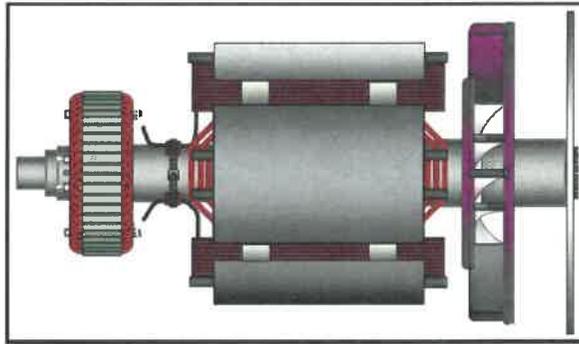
SINGLE BEARING ALTERNATOR ROTOR SHOWING COUPLING DISCS BOLTED TO DRIVE END COUPLING HUB (AT RIGHT)
